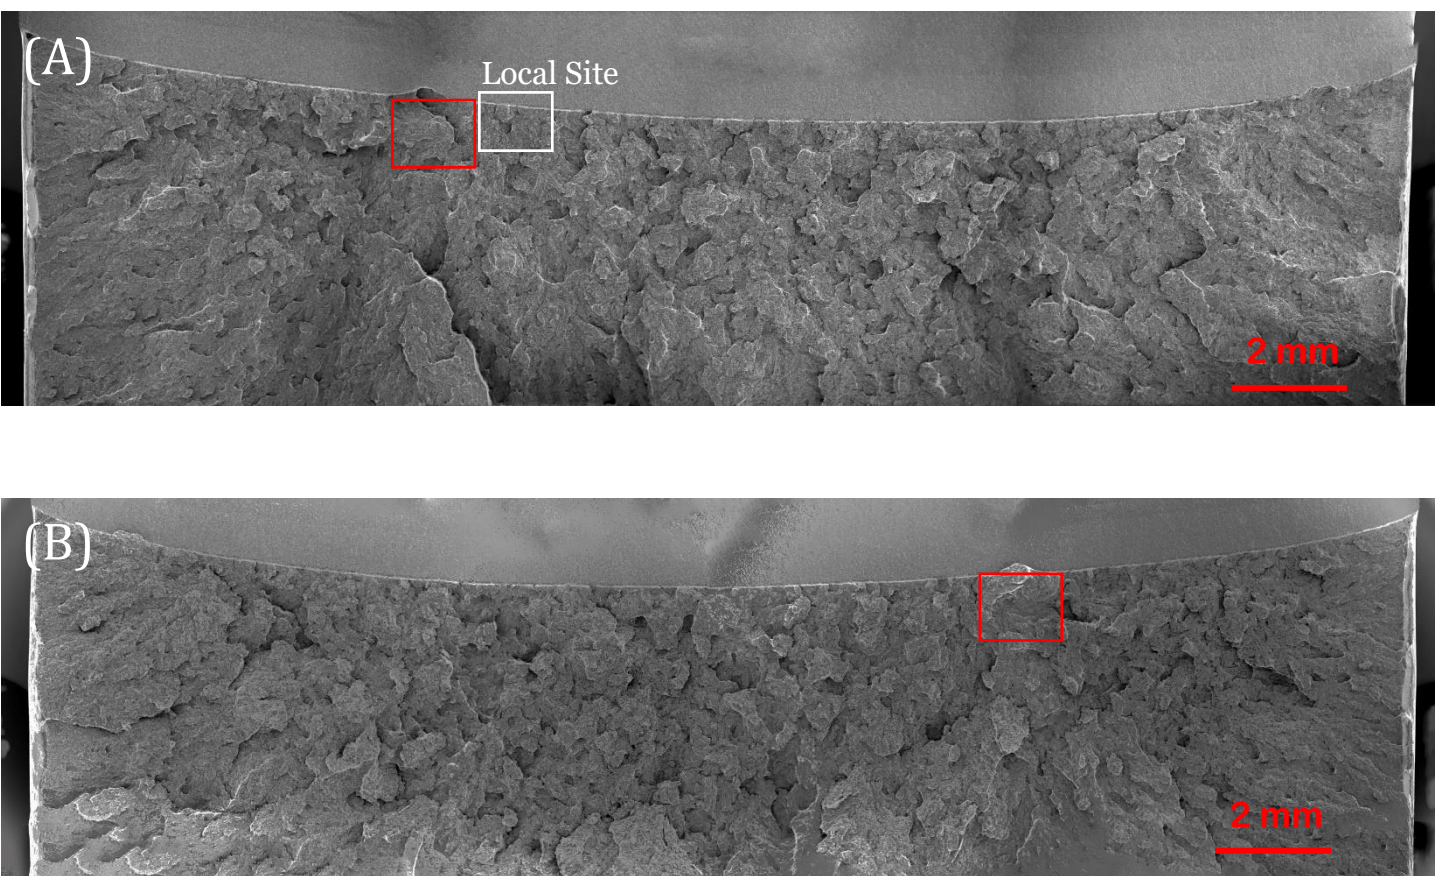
(a). Overview of fracture surfaces on a sharp-cracked specimen, designated CT HT2-01, tested at -100 °C. Red frames on matching halves (A) and (B) denote the most probable fracture initiation areas. White frame indicating local cleavage area. Test results: Critical J-integral ( $J_c$ ) value of  $64.9 \text{ kJ/m}^2$ , crack tip opening displacement (CTOD) of 0.050 mm, local cleavage fracture stress of 1900 MPa ( $n=0.1$ ), fracture initiation distance ( $X_o$ ) of 649  $\mu\text{m}$ , and an average stable crack extension of 16  $\mu\text{m}$ .
